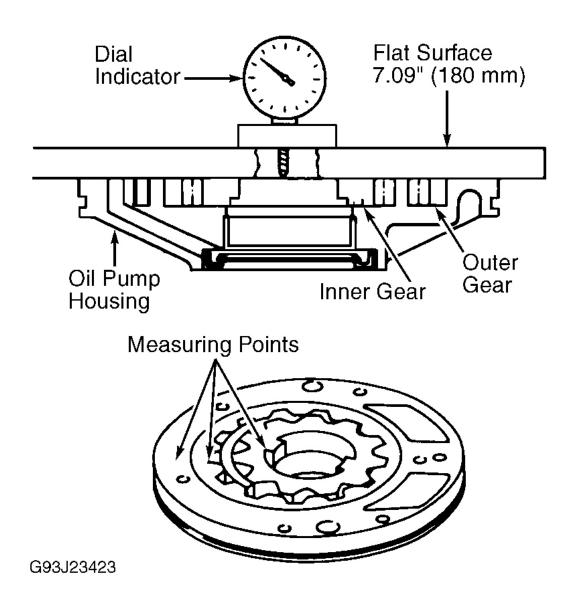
Measuring Oil Pump Side Clearance Courtesy of NISSAN MOTOR CO., U.S.A.
